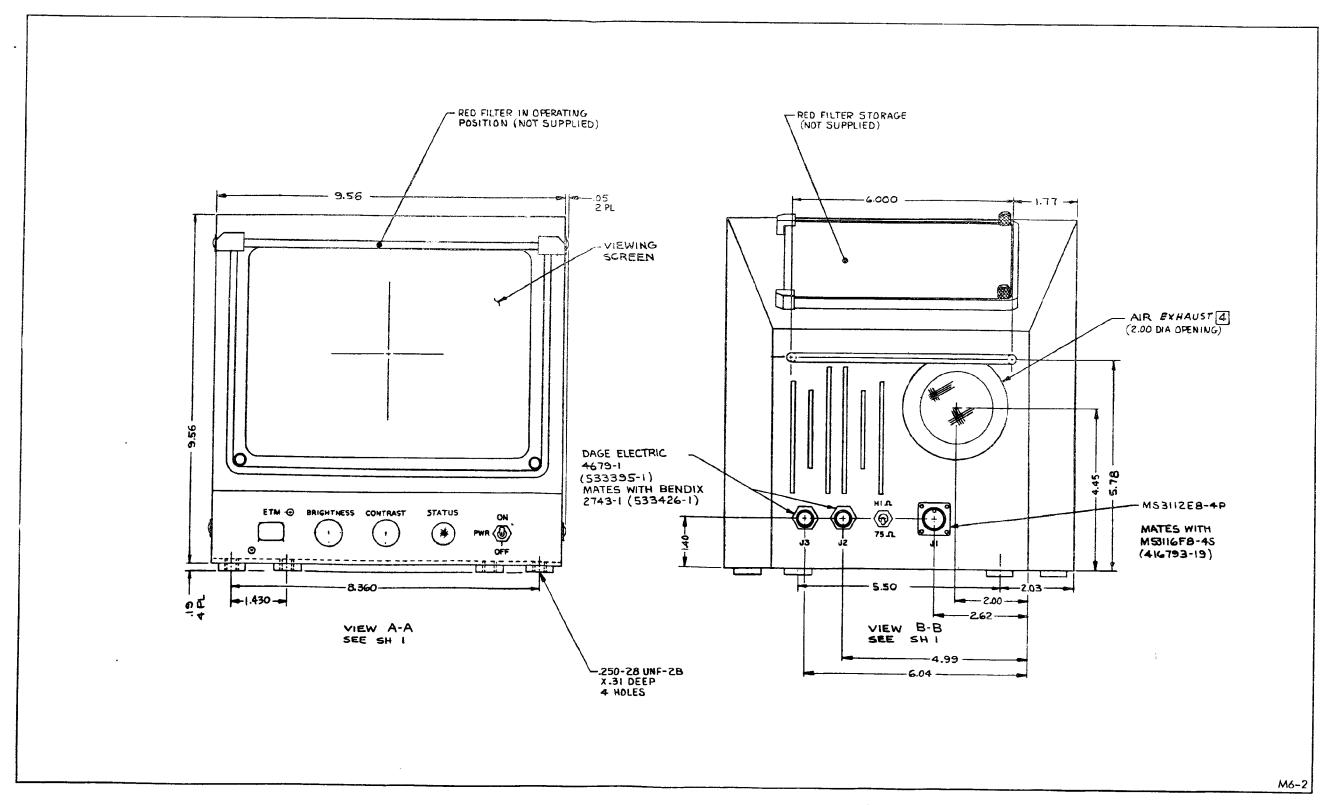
Indicator, video, outline drawing. (sheet 2 of 4)
